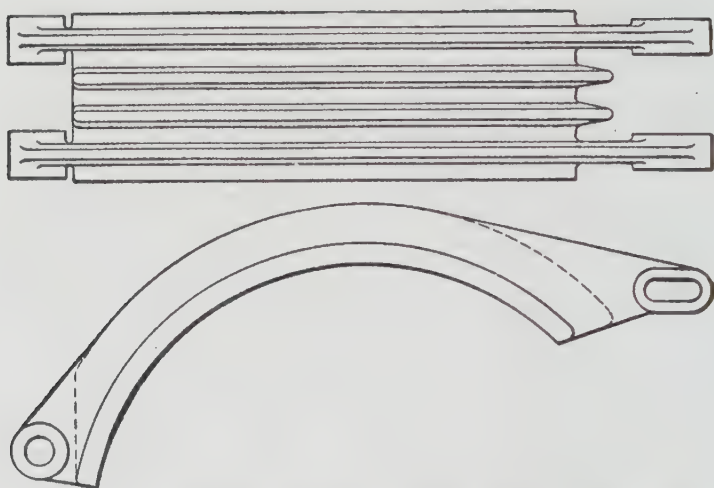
BRAKE SEGMENT WITH COOLING FLANGES.
